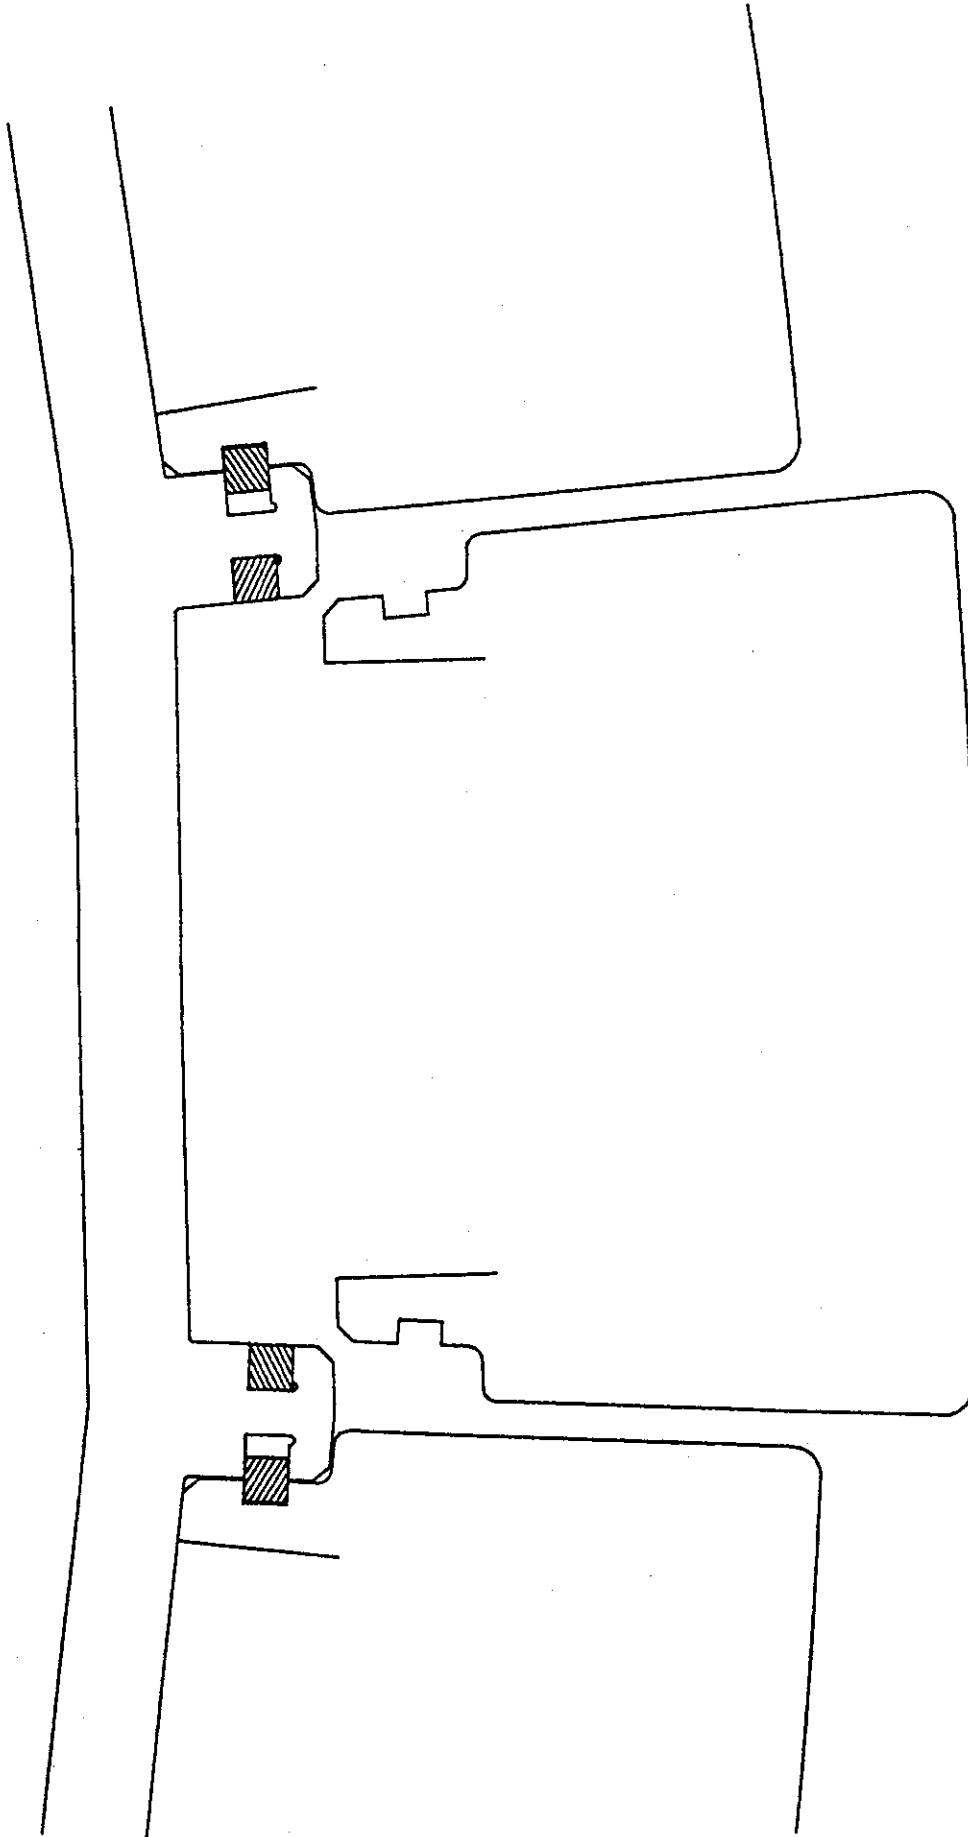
A schematic view showing the concept of mechanical locking of the blanket module by using keys.
